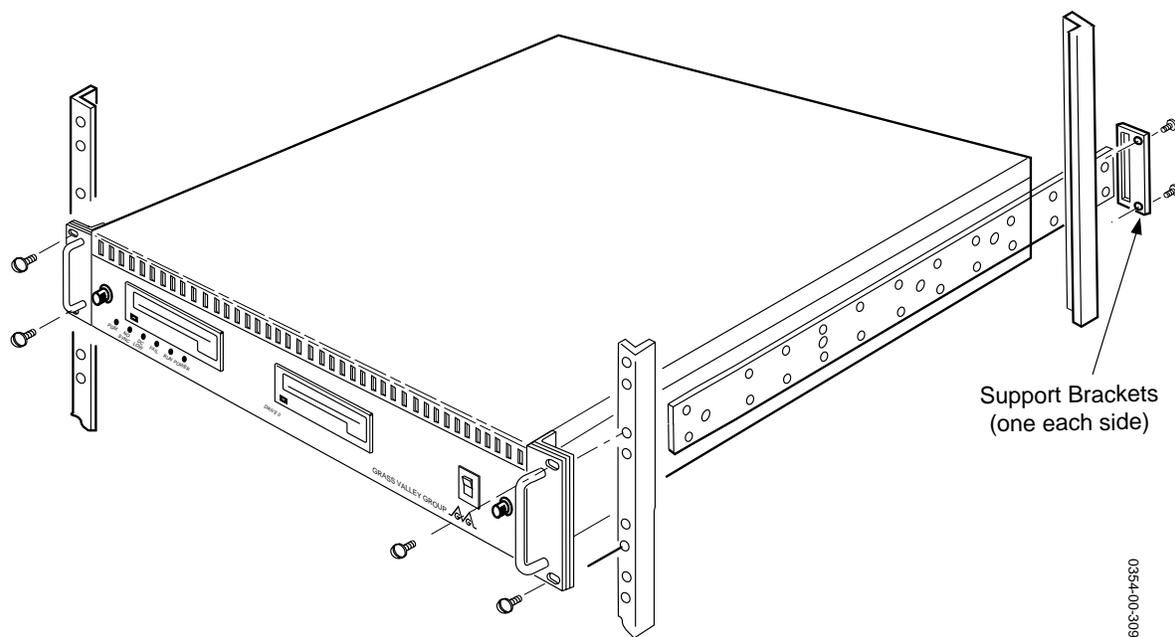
Installing The Computing Chassis Into The Equipment Rack
